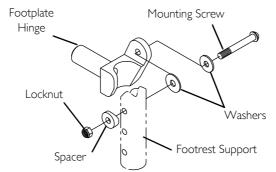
Installing Adjustable Angle Flip-up Footplate Hinge
